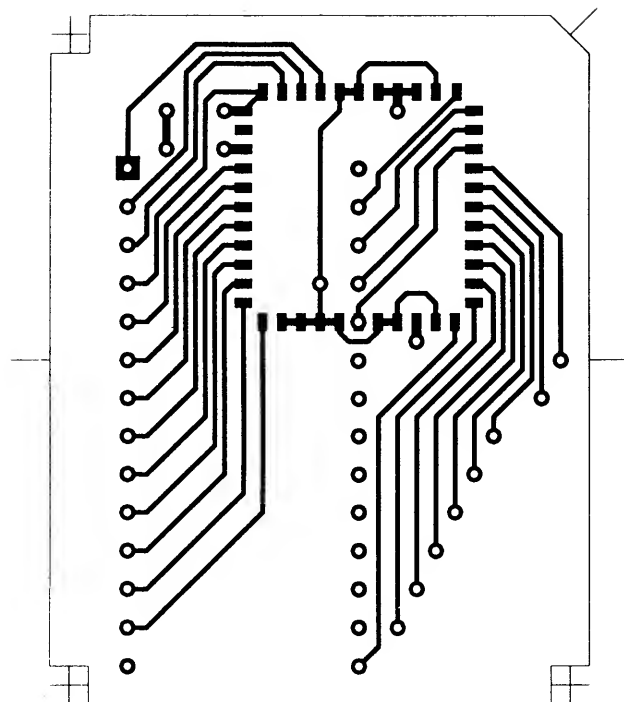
PCB Component Side Layout Pattern Using Surface Mounted PLCC
